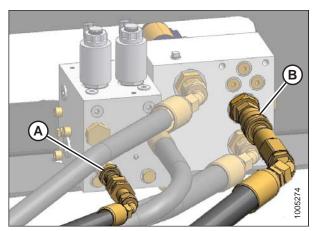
M150/M155/M155*E4* without Reverser Valve
